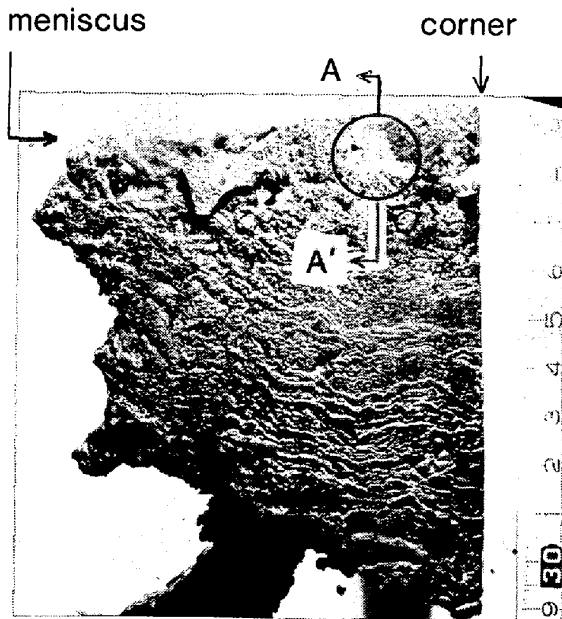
Appearance of sticking part between slab and Ni plating mould.
